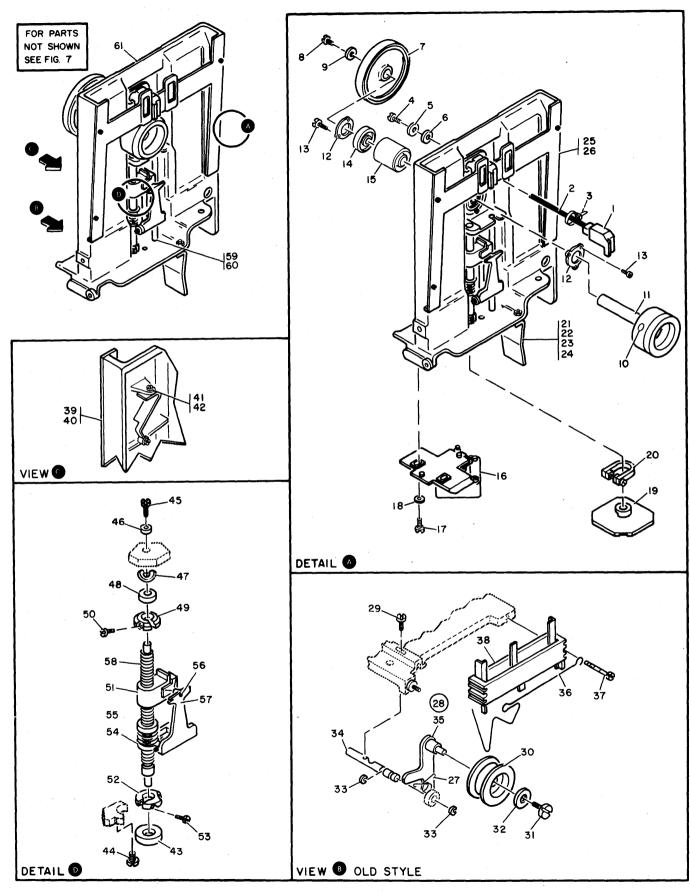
BASE PLATE ASSEMBLY—ANGLE MOUNT. SEE LIST 9.
